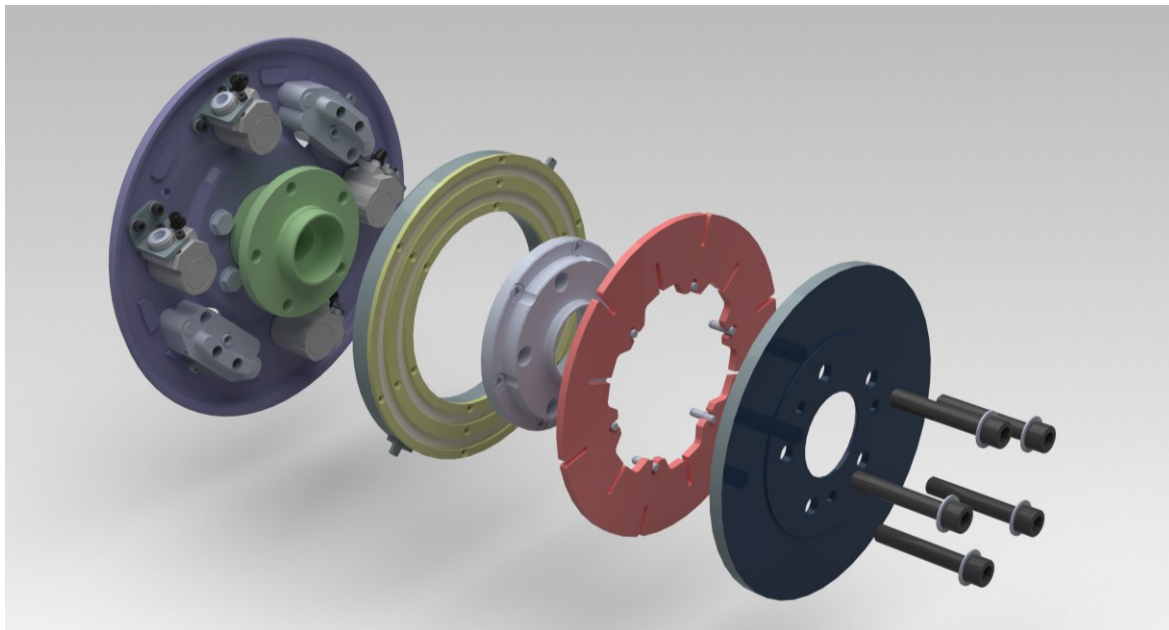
Exploded view of the assembly for hydraulic actuation of the yoke ring without friction lining rings
